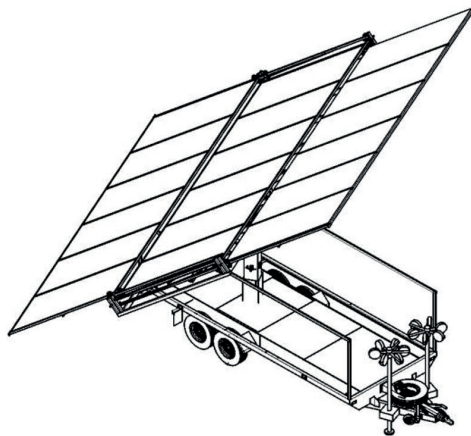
Technical drawing of the mobile solar trailer showing dual-axis tracking mechanism and panel array configuration
